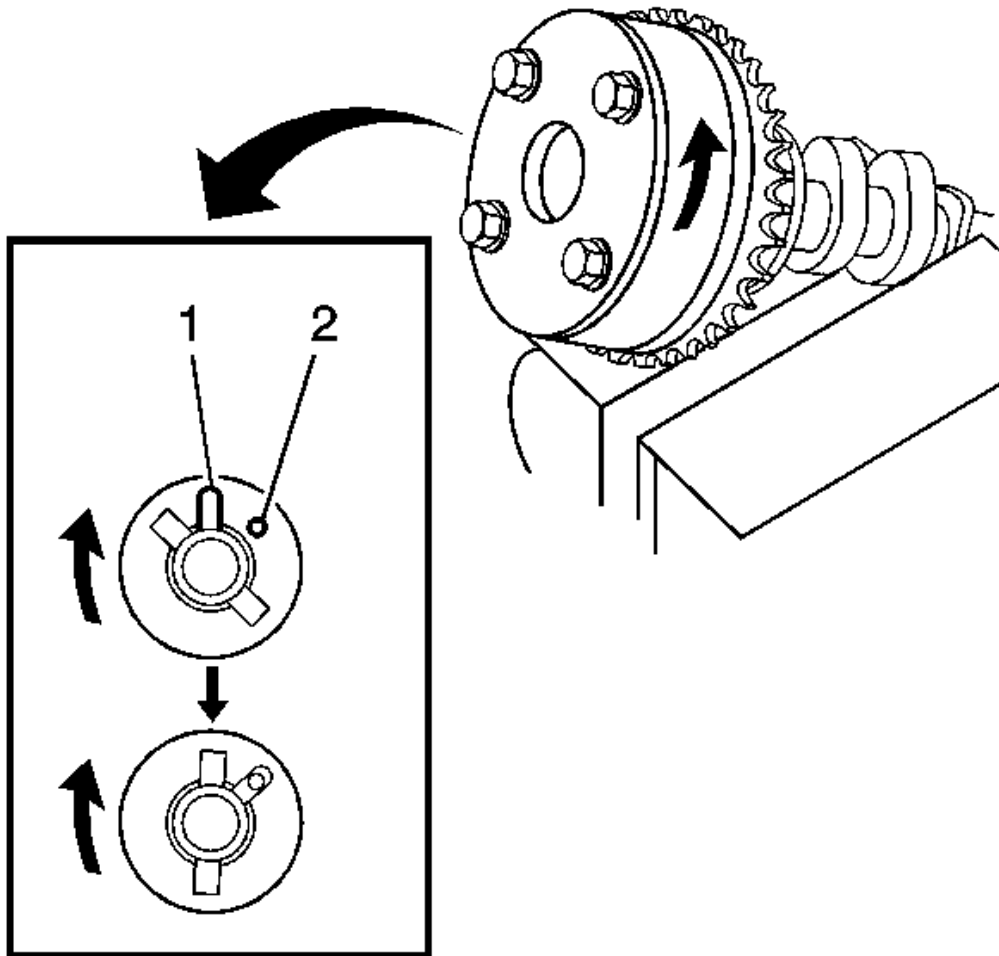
View Of Turning Camshaft Timing Gear In Retard Direction (Clockwise)
